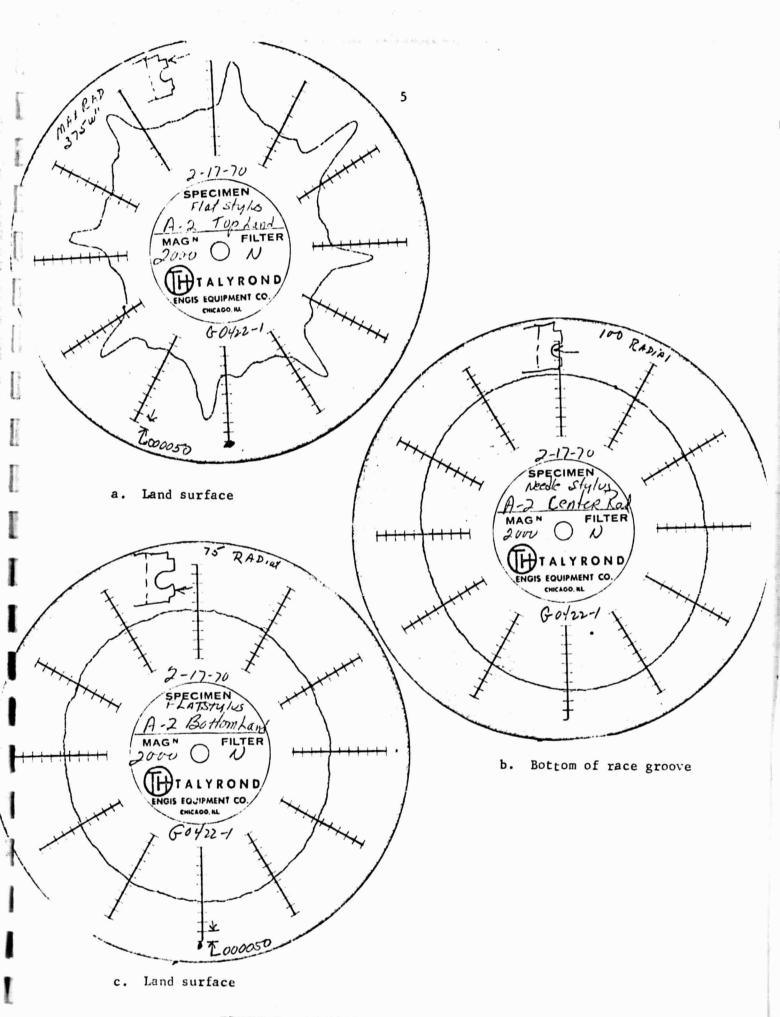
TALYROND TRACES OF SEVERELY BRINELLED FAN BEARING INNER RACE
